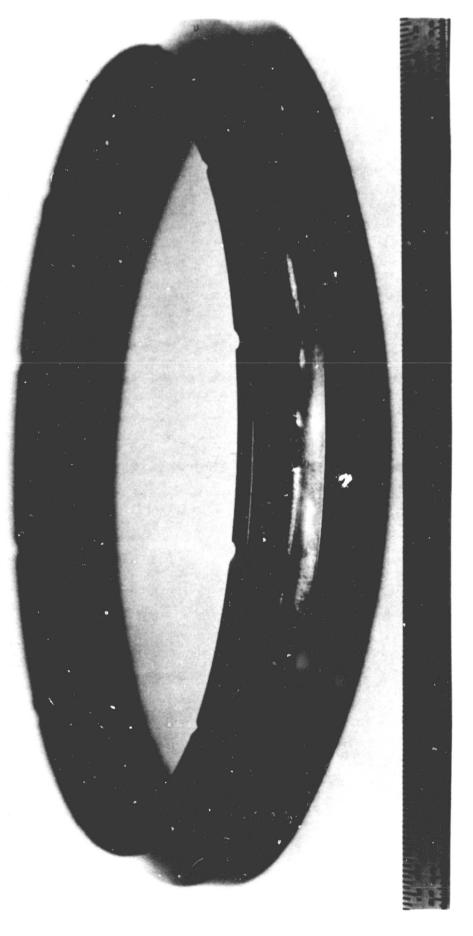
Typical Spalling Fatigue Failure on CBS 600 Inner Rings on Bearing S/N 3.
